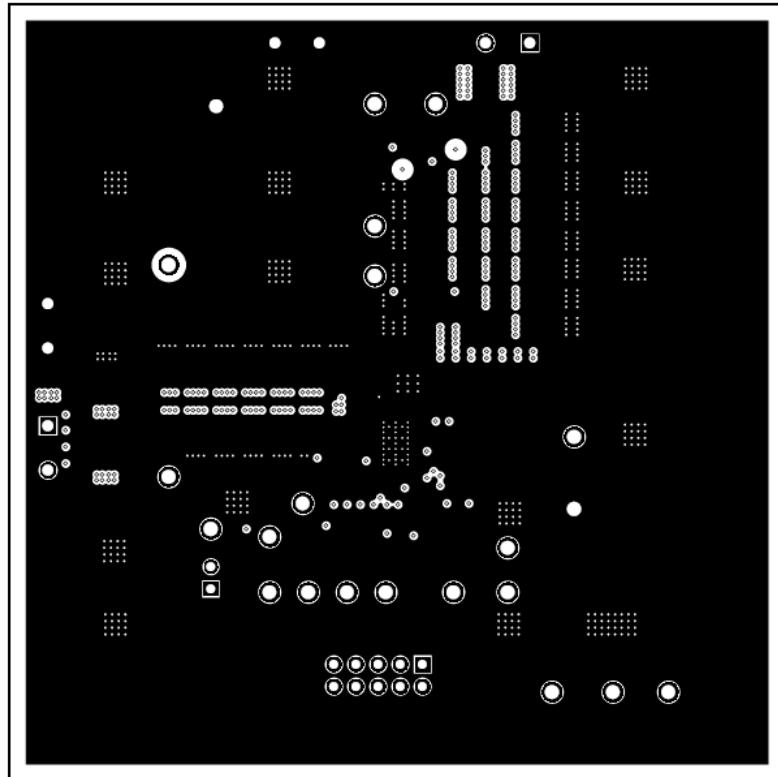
PWR-784EVM Inner Layer 1 (Top View)
